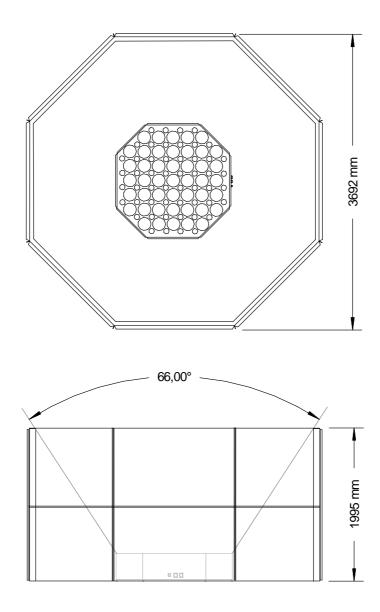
Outer dimensions of a freestanding enclosure (Example: XFAS)
